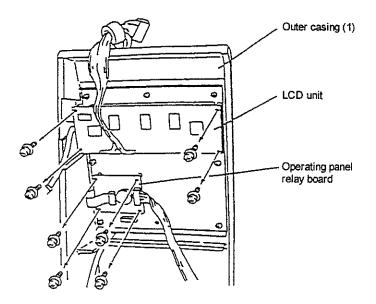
Removal of Operating Panel Relay Board and LCD Unit
